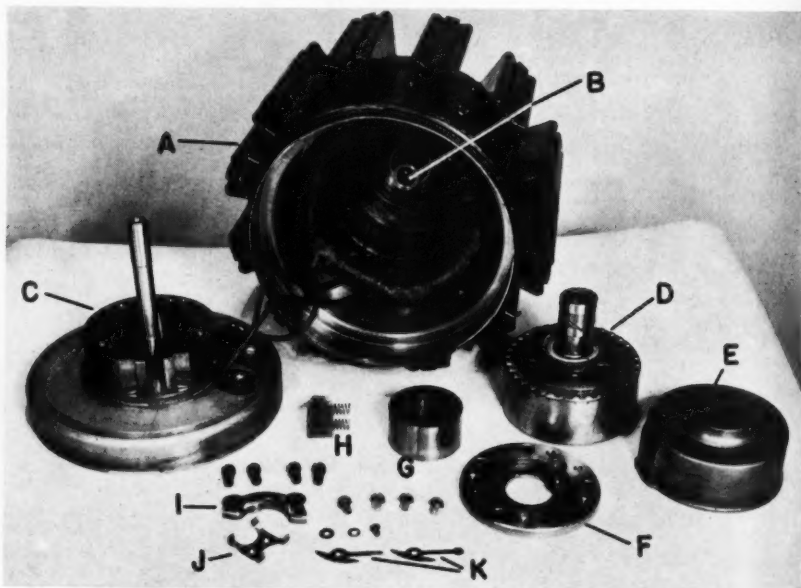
COMPRESSOR PARTS READY FOR ASSEMBLY.
